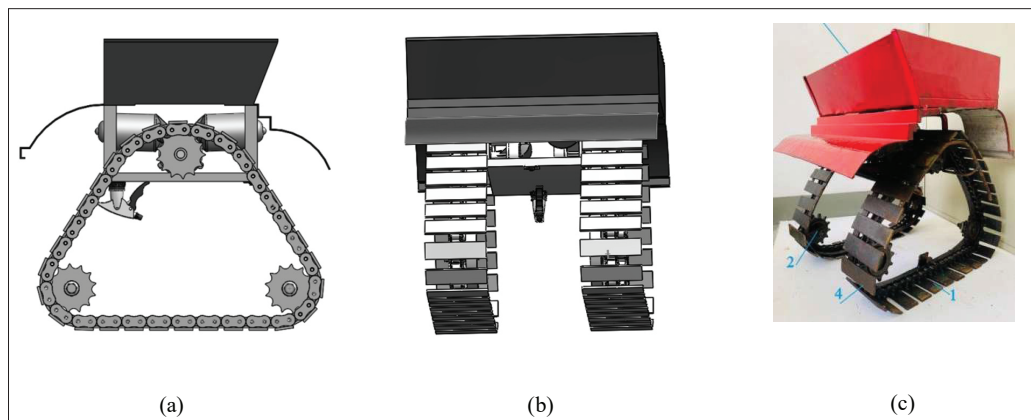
Weedex, (a) side view of the design (b) front view of the design (c) final Prototype
